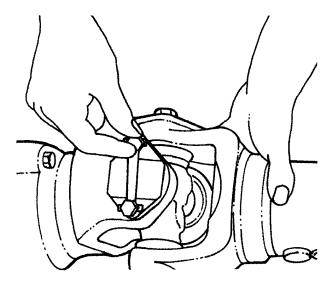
Assemble Lockstrap and Bolts to Yoke Lug
